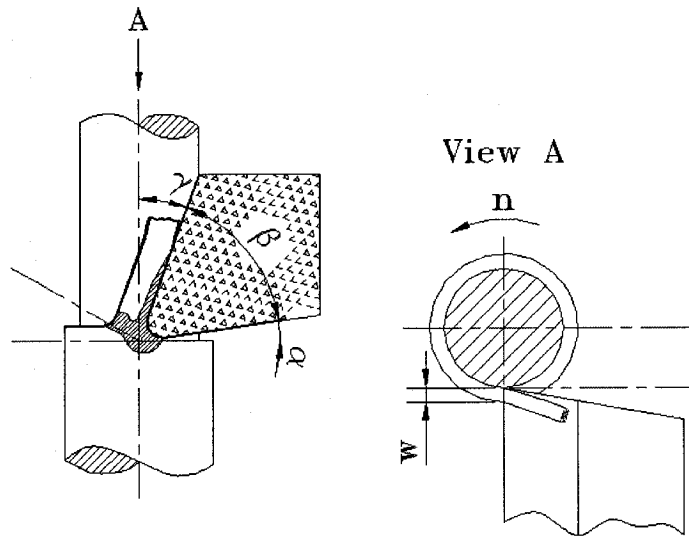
Tool with rounded cutting edge in orthogonal turning operation.
